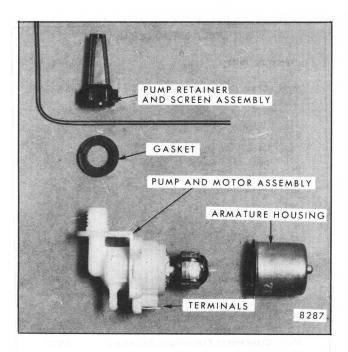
Jar Mounted Motor and Pump Assembly
